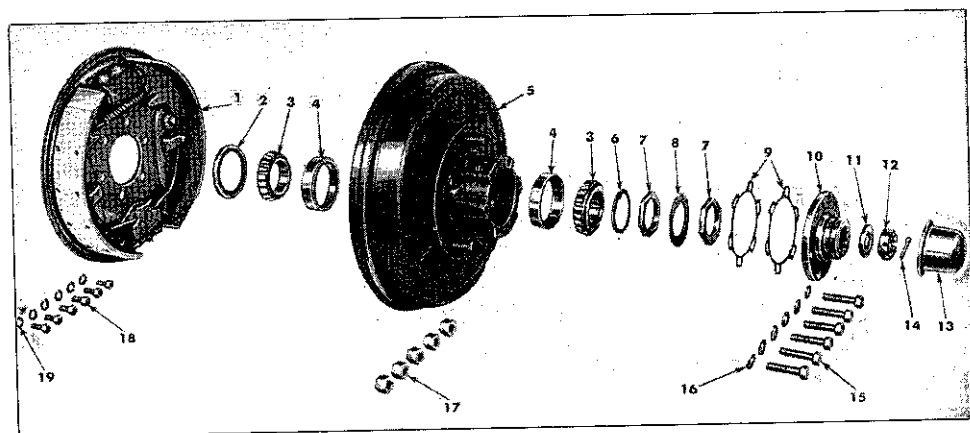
FRONT WHEEL ATTACHING PARTS — 4-WHEEL-DRIVE VEHICLES
